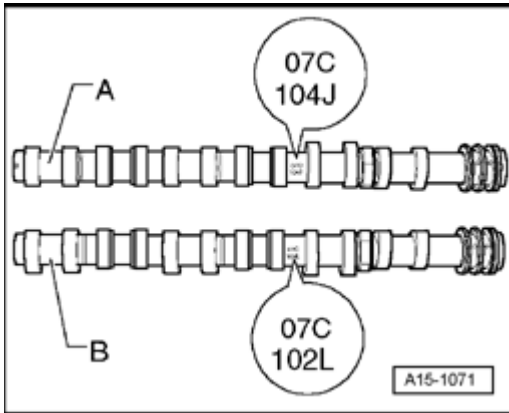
Camshaft Identification Cylinder Bank 1 (Right)
